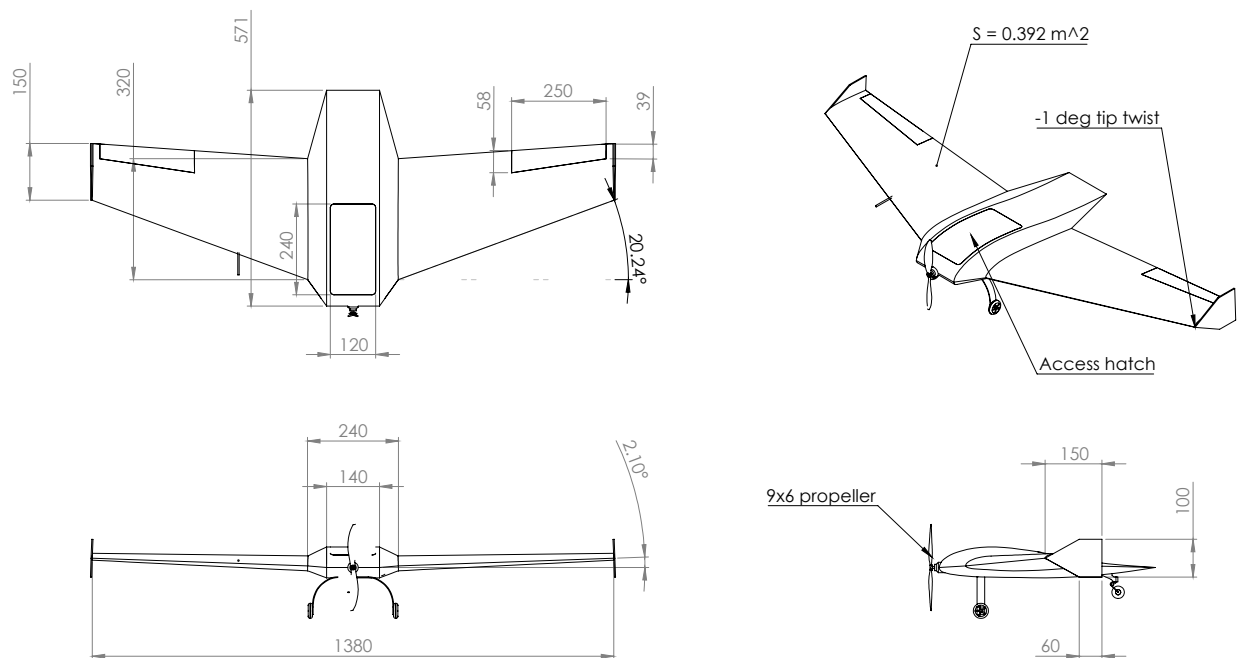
Aircraft Planform Drawing (dimensions in mm)
